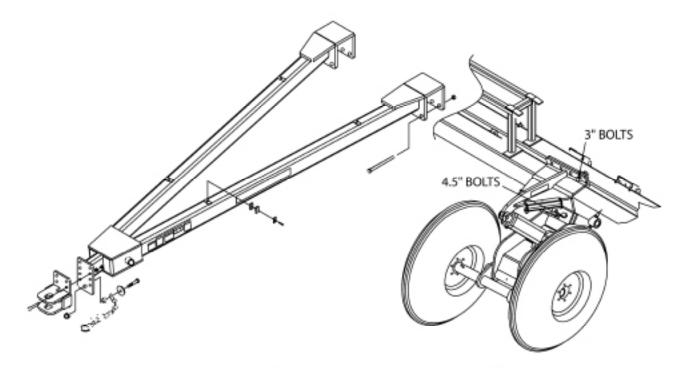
Pull-Type Hitch and Wheel Mast Assembly
